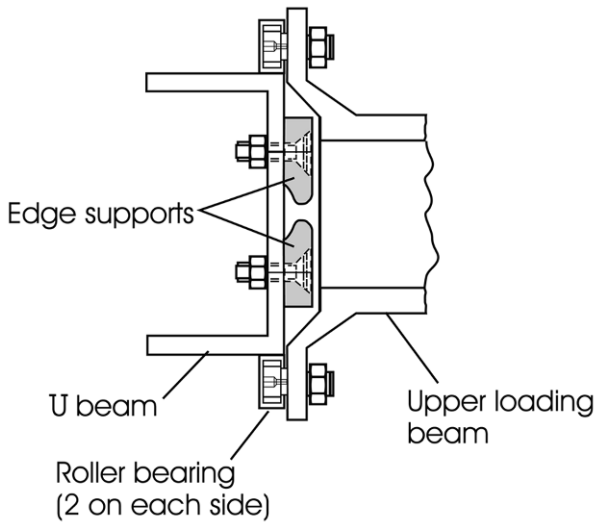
The upper loading beam is guided by two pairs of roller bearings in contact with the vertical U-beams of the compression test fixture.
